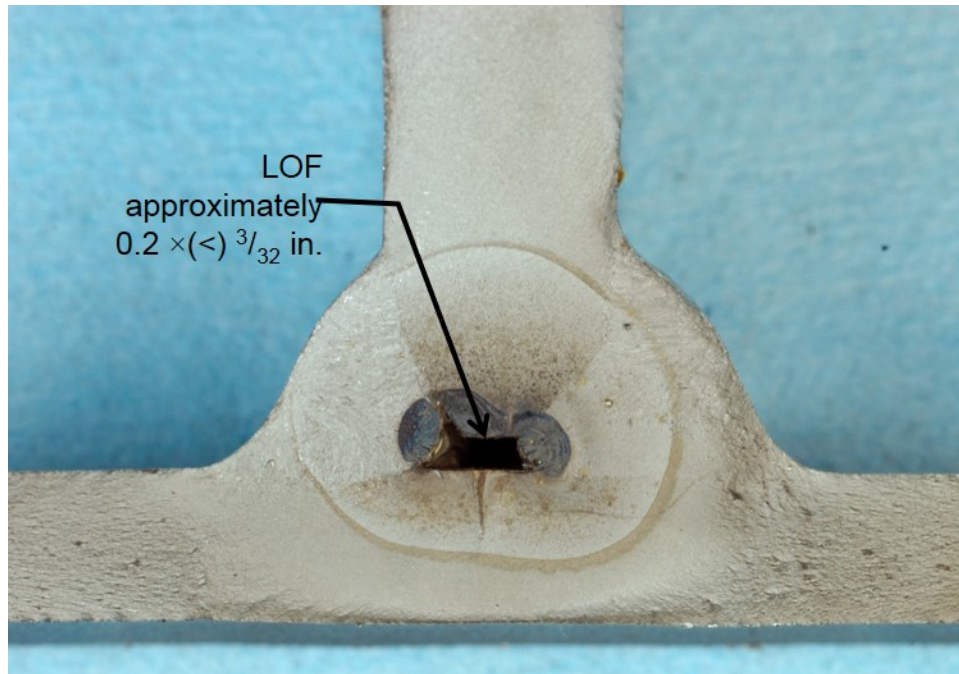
Fracture surface photographed perpendicular to the camera to clarify the LOF — crack to the north of rib in MU3
